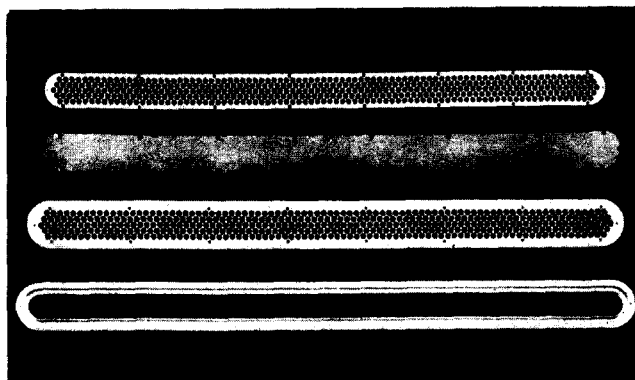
Component parts of the 50 cm e-beam window. Frame is grooved for the one KW heater.
